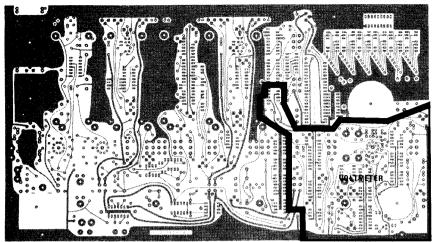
FOIL PATTERN of the component side of the PC board overlayed with outlines of the area occupied by the voltmeter. The figure below shows the parts that are installed in this area.
